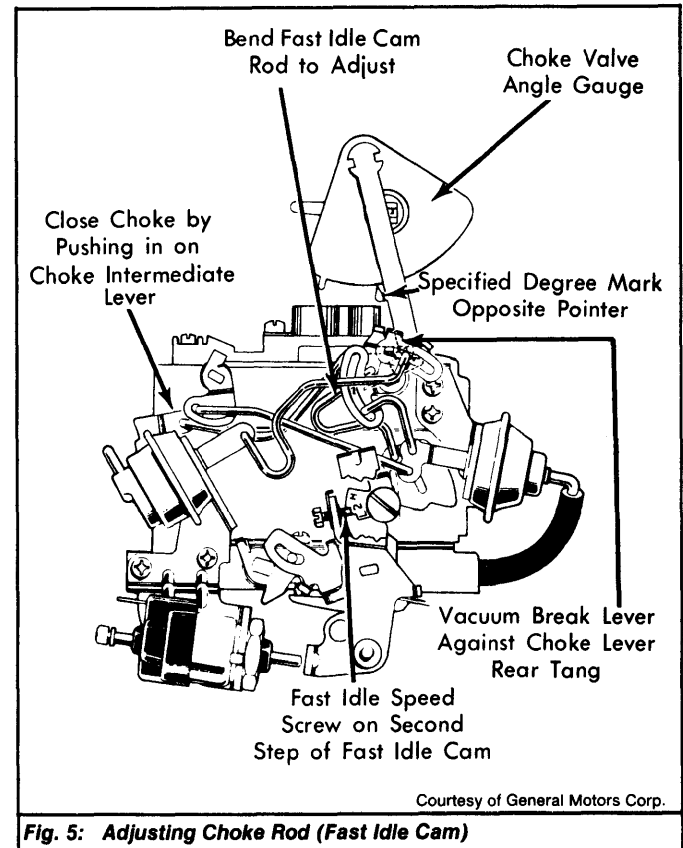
Adjusting Choke Rod (Fast Idle Cam)
